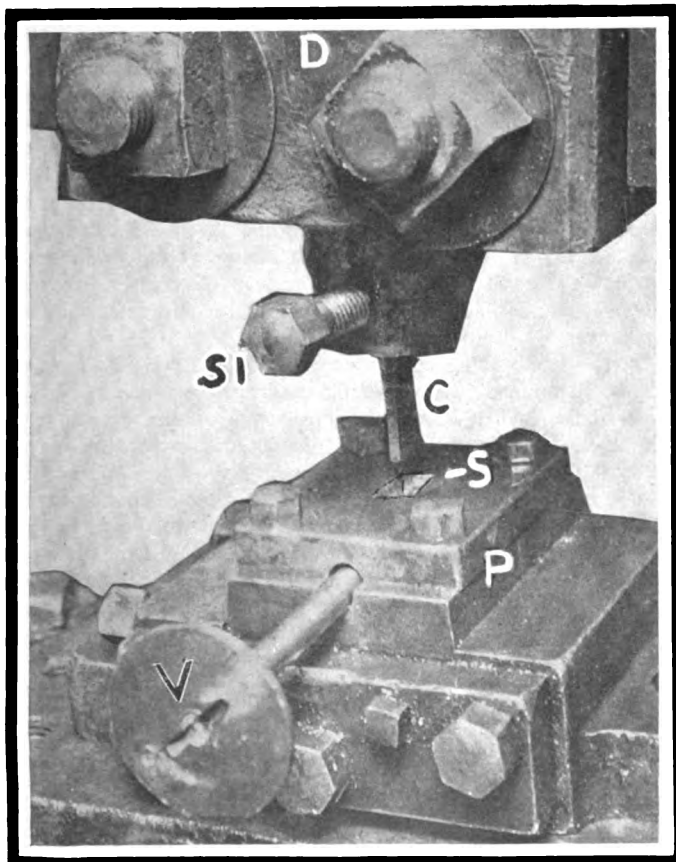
Slotting machine with which the slots in the valve stem are cut
